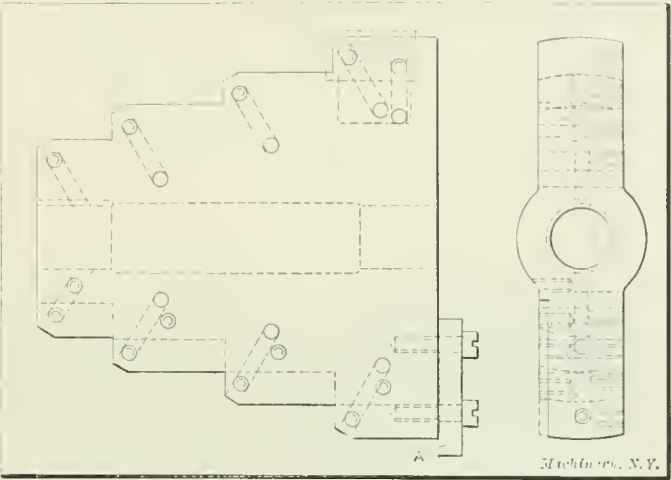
Boring Head used for Boring and Facing Inside of Cone-pulley Steps
